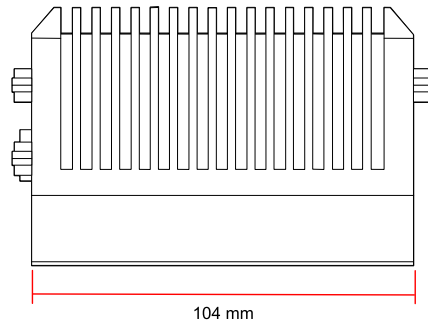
AMOS-3002-2D10A2 Dimensions - Side view
